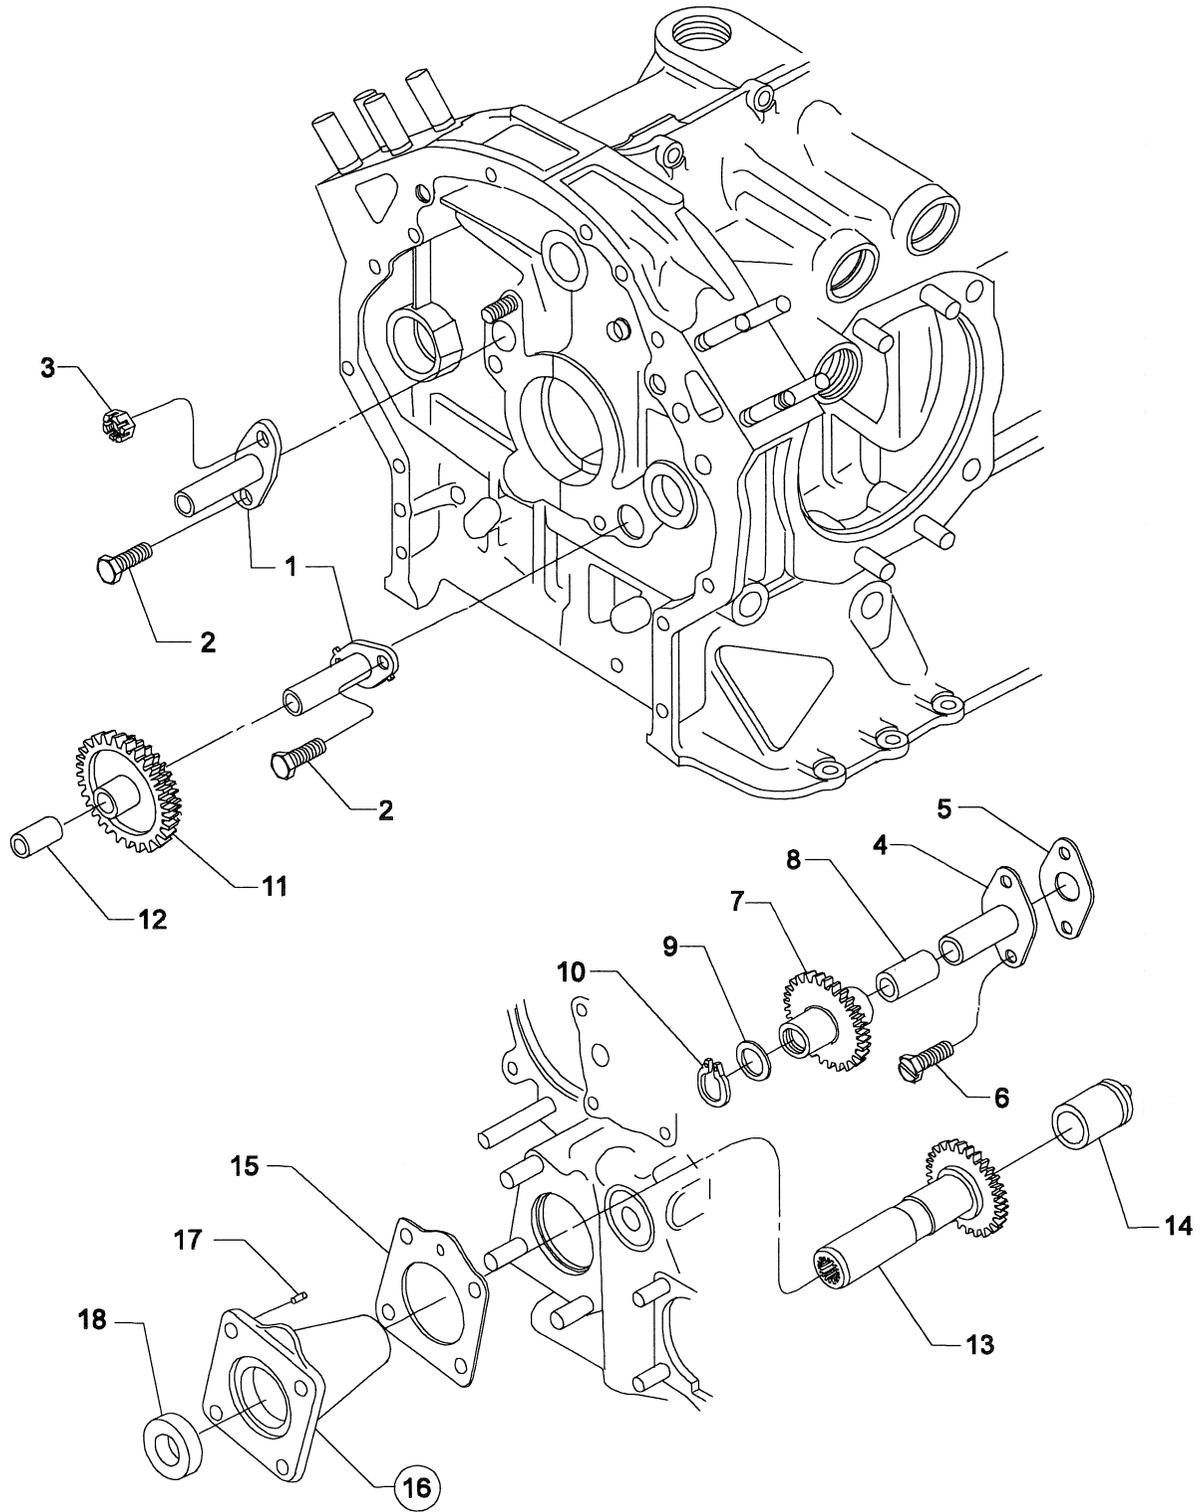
CRANKSHAFT AND FUEL PUMP IDLER GEARS
